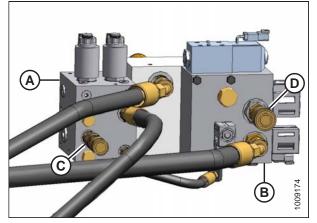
Valve Blocks with Reverser Valve Configured for Auger Header
